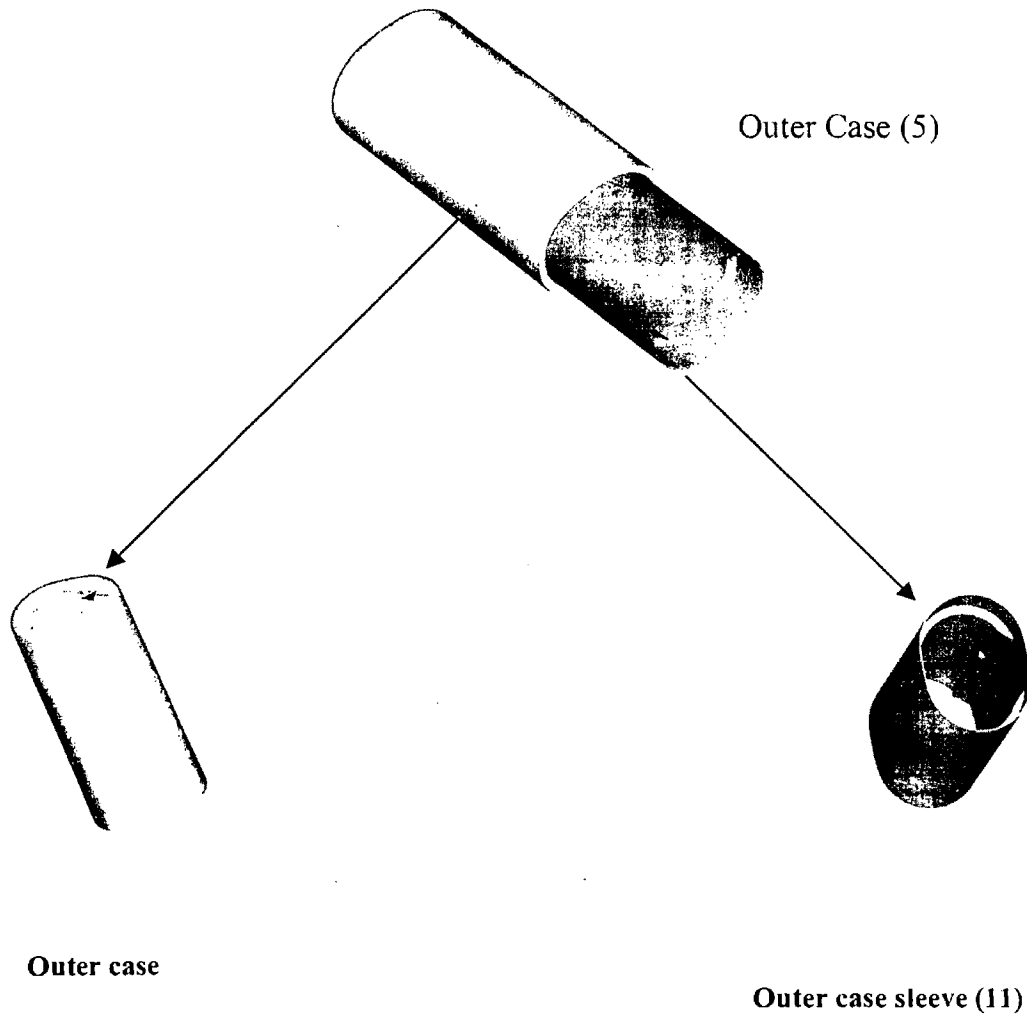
EXPLODED VIEW OF THE FIXED FOCUS
